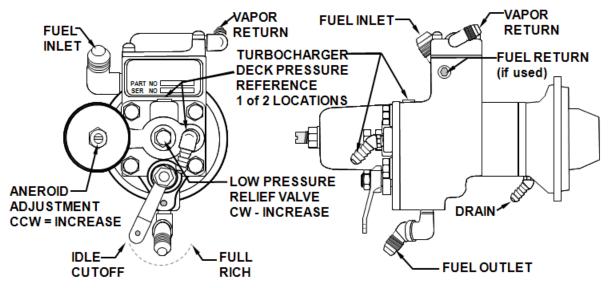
Aneroid and Mixture Control Equipped Fuel Pump – Turbocharged Engine
